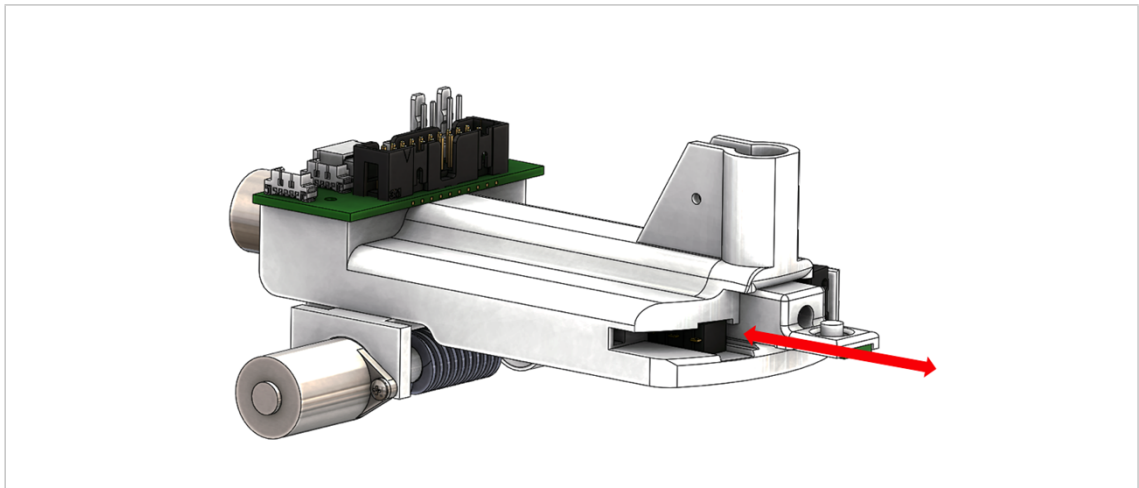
Partially assembled right view of the spoon base indicating the direction of movement.
